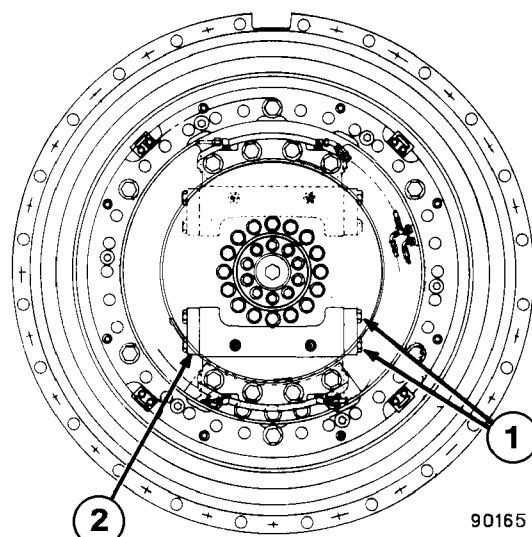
REAR BRAKE CALIPER LINING REPLACEMENT
